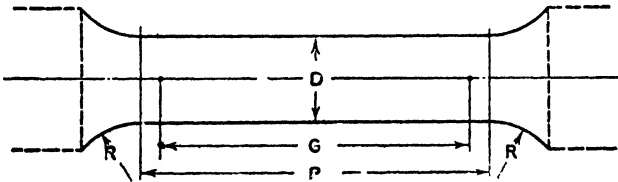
DIMENSIONAL PROPORTIONS OF OTHER SIZES OF ROUND TEST PIECES
